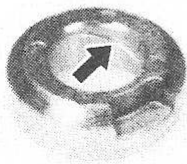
B.8 Check the outer camshaft bearing for wear and damage (Sec 7)
